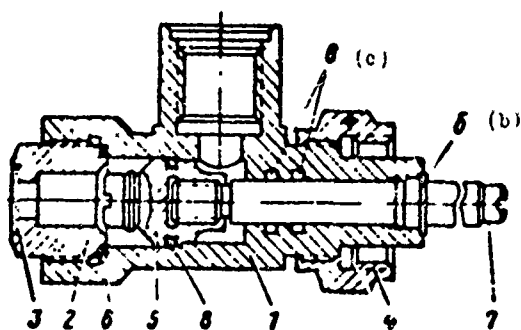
Explosive pin: 1 - housing; 2 - detent; 3 - diaphragm; 4 - coupling nut; 5 - piston; 6 - gasket; 7 - pin; 8 - seal ring; b - pin bead; c - annular passages.
